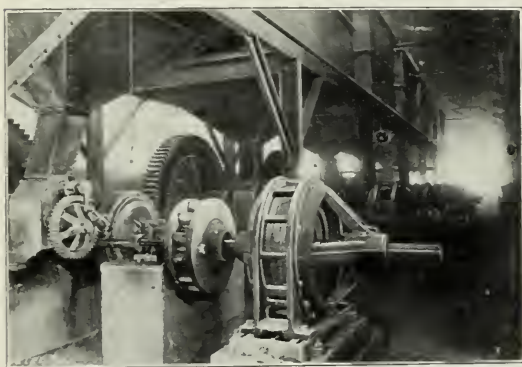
TUBE MILL DRIVE, SANDUSKY WORKS, SHOWING FLEXIBLE COUPLING.
